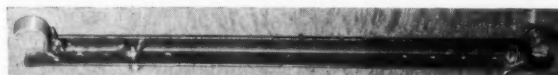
Angle iron showing removal of 1" section, drilled holes, and pipe brackets which secure it to wheel chair frame.
